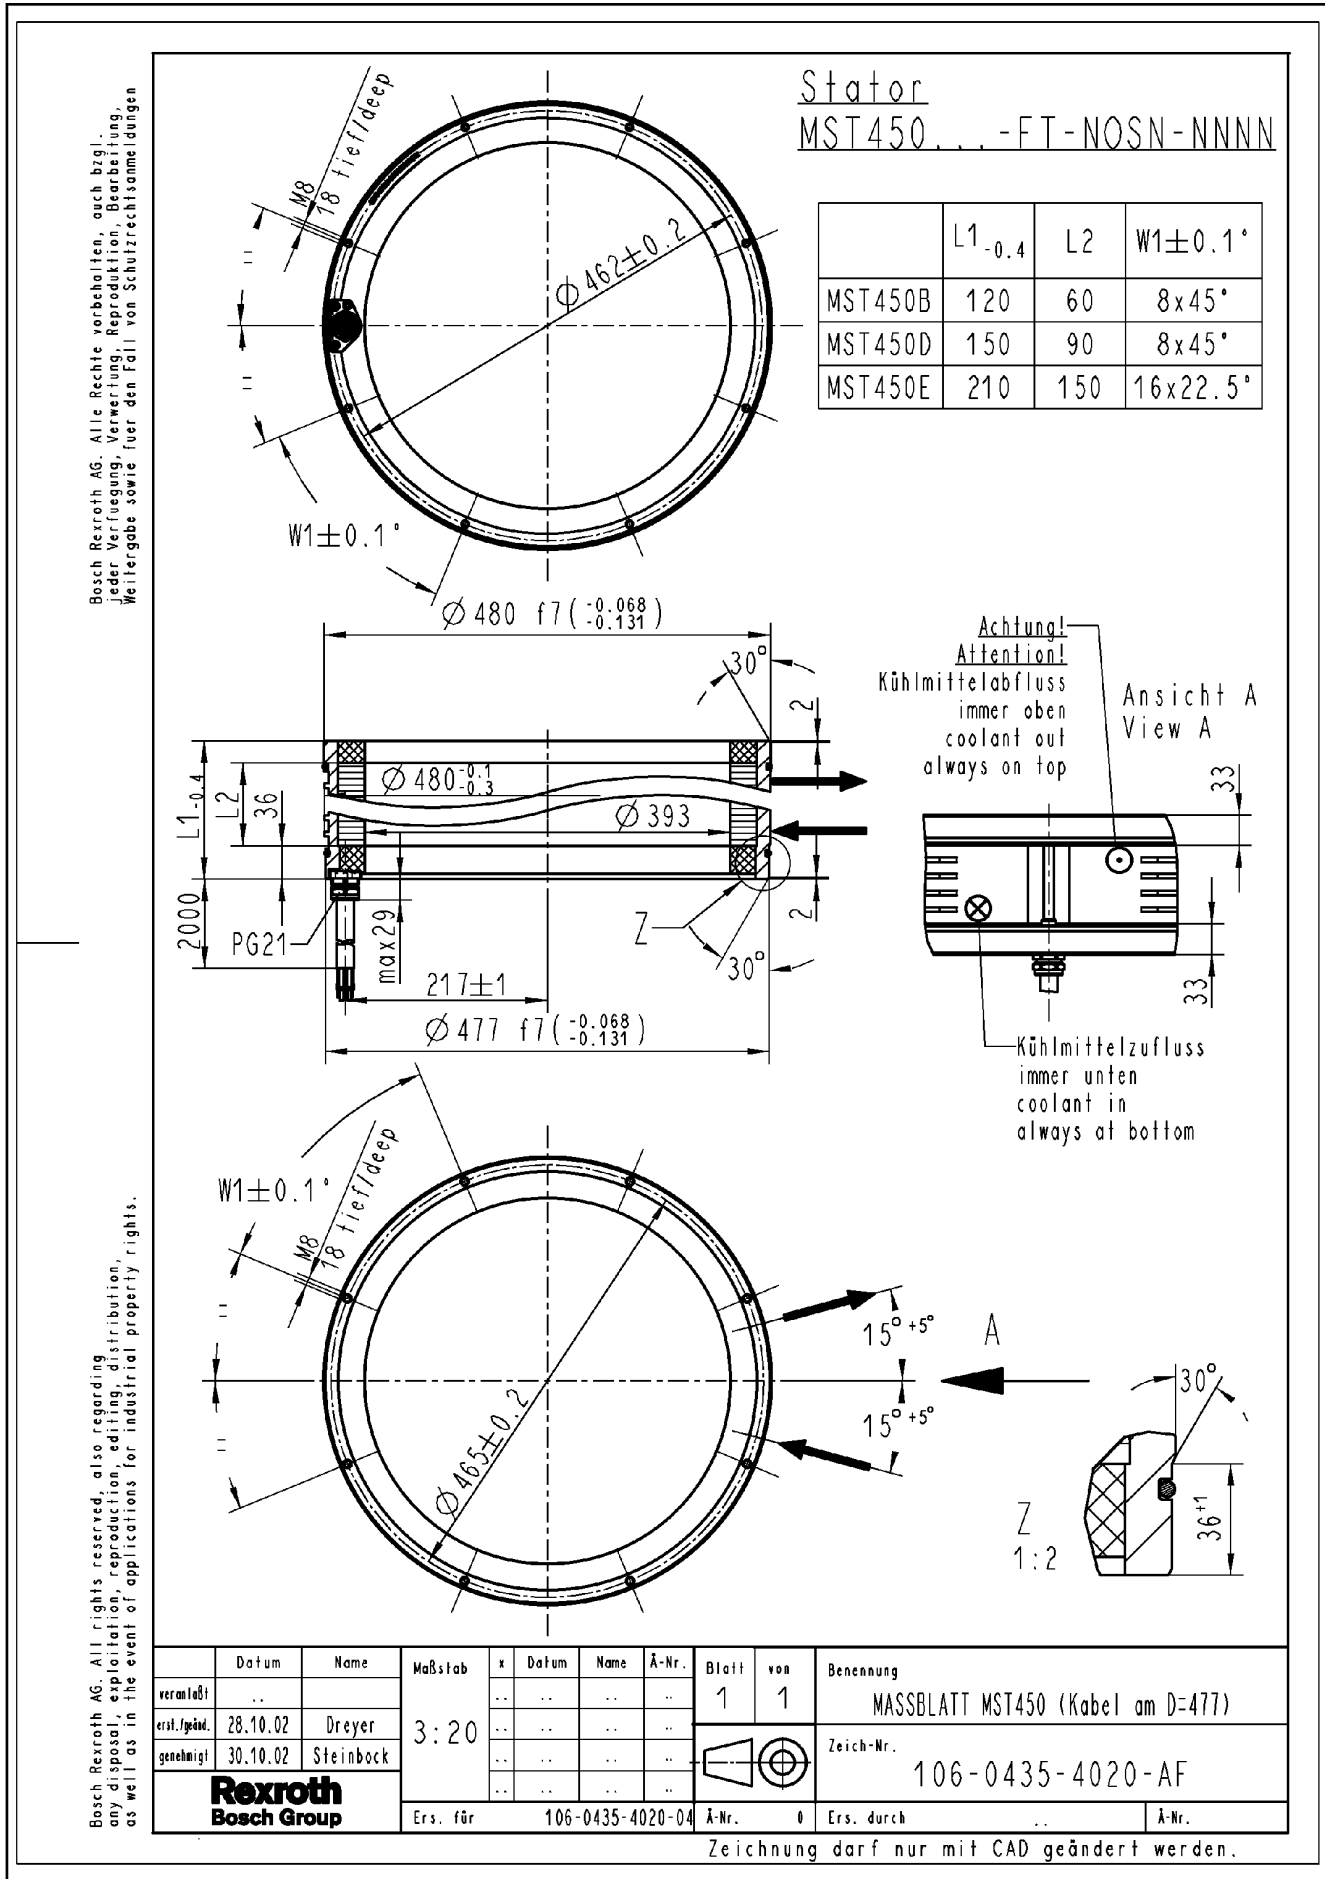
Dimension sheet MST450, electrical connection "SN"
